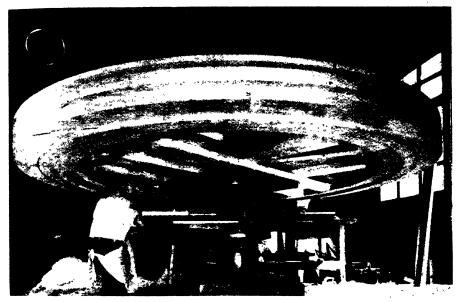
Fastening the 10-ft. diameter wheel pattern to the rotary table of a pattern milling machine. Viewed from below the working position
